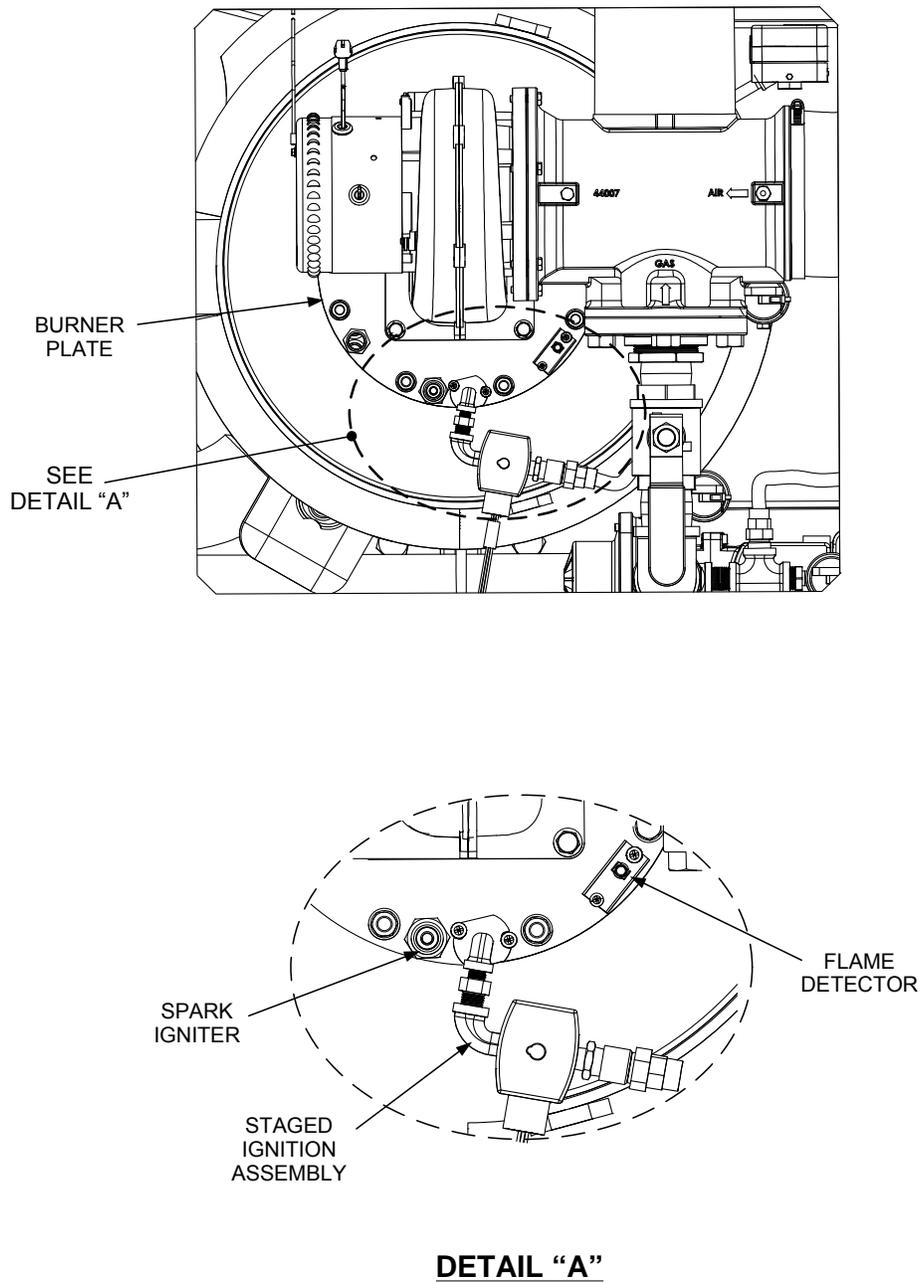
Burner Assembly Igniter & Flame Detector Locations
